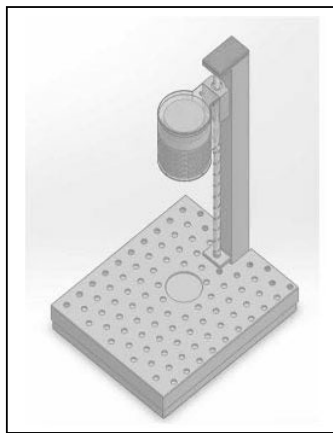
Assembly drawing for project Coffee to Go using CAD.
